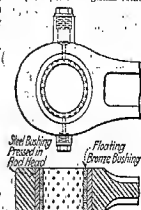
Floating Bushing. Big End Locomotive Main Rod.
